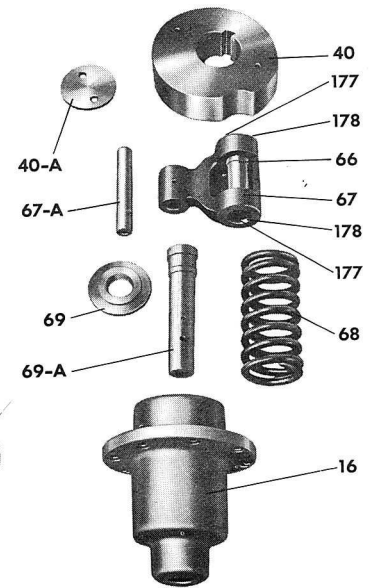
ECCENTRIC SHAFT (Illustration typical but not exact in detail)
